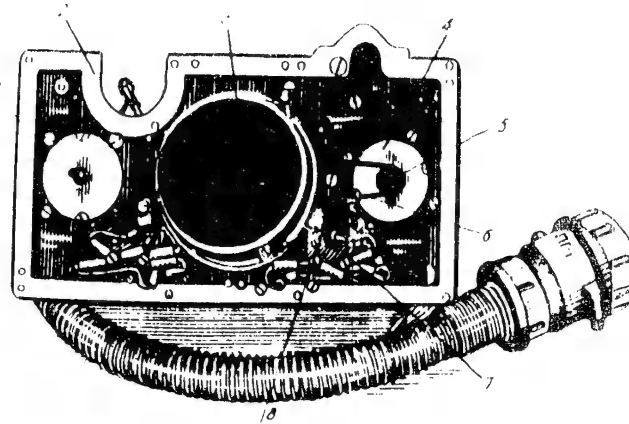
SIGHT HEAD FRONT COVER (INNER VIEW)
